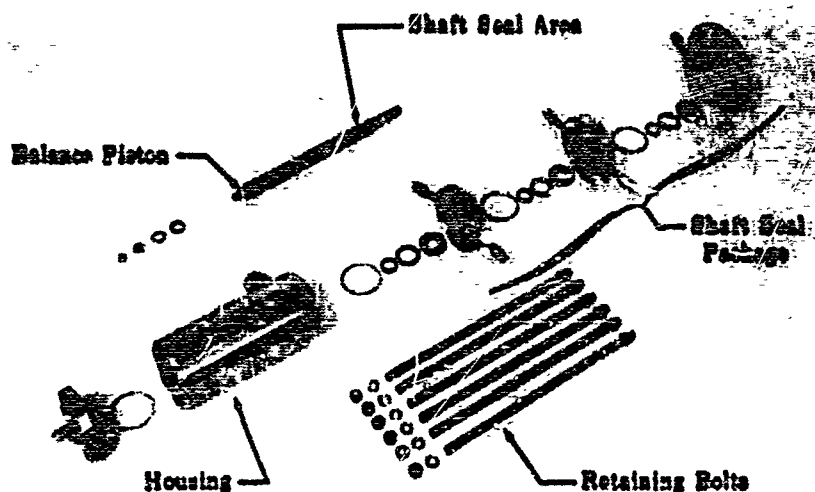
Exploded View of Piston Seal Test Rig FD 23420
